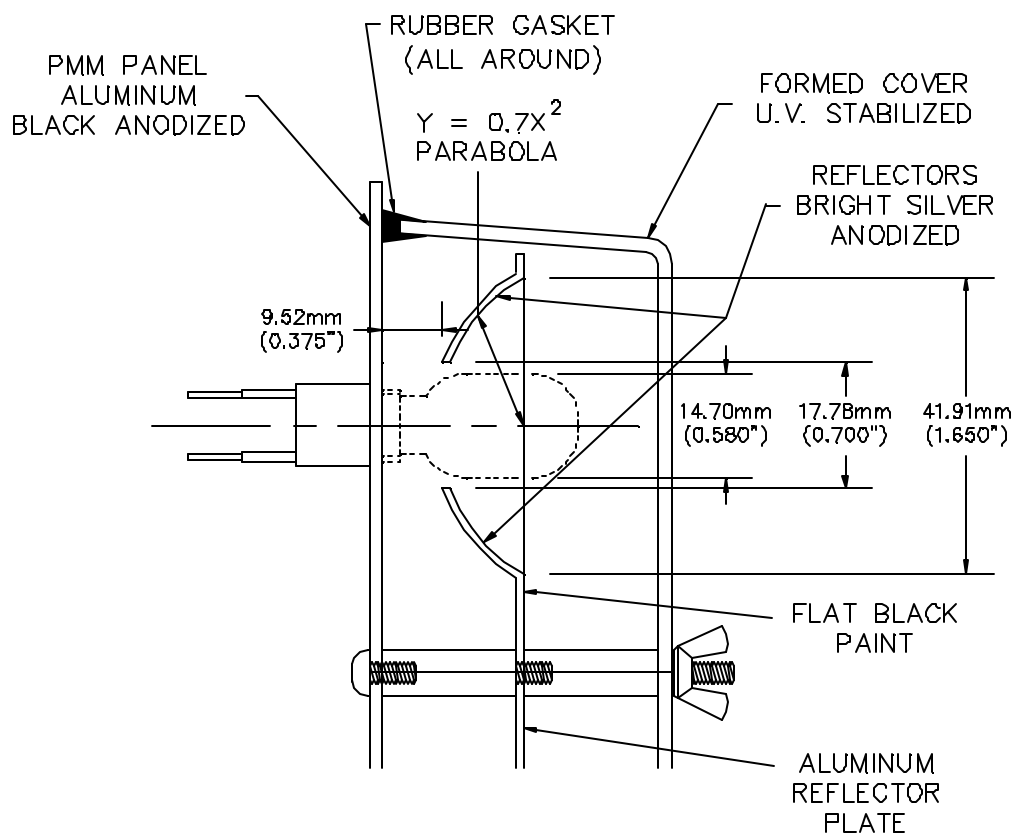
Side View of Model 500 Pixel with Full Panel Molding.
